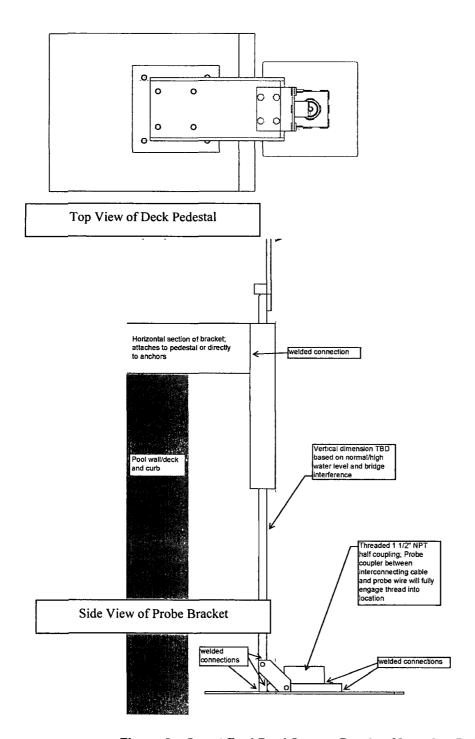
Spent Fuel Pool Sensor Bracket Mounting Details
